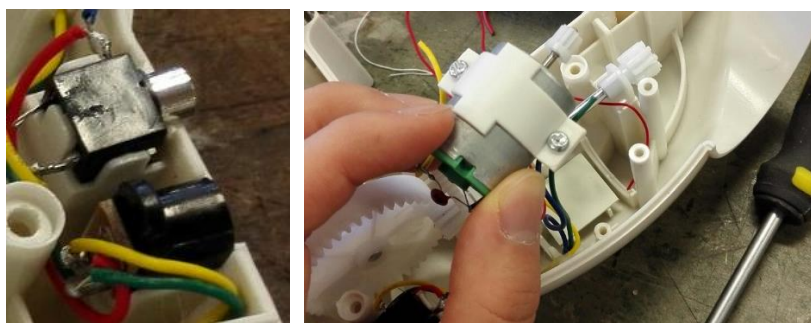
(left): Power and foot paddle connection ports for the machine.
